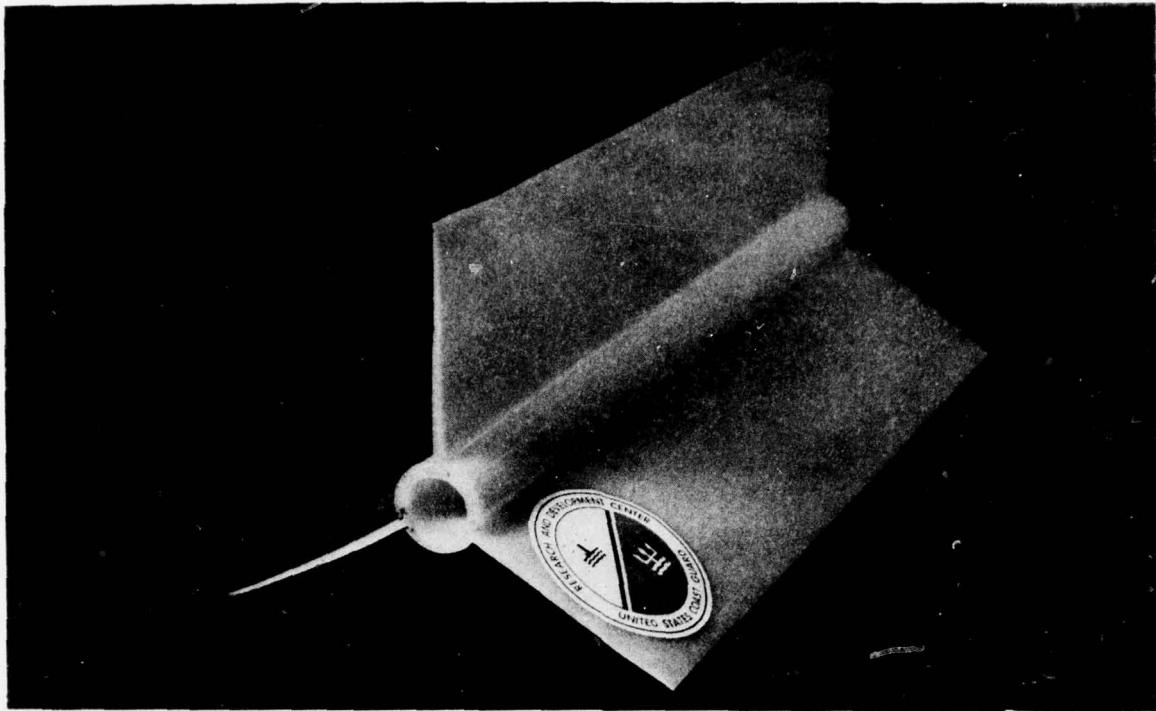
The Four Piece Extruded Iceberg—Tethering Dart Tail Assembly.
